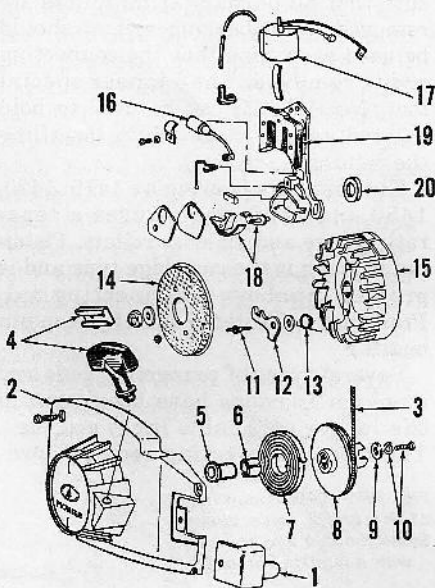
Exploded view of the rewind starter. Some models may not be equipped with steel bushing (5).
